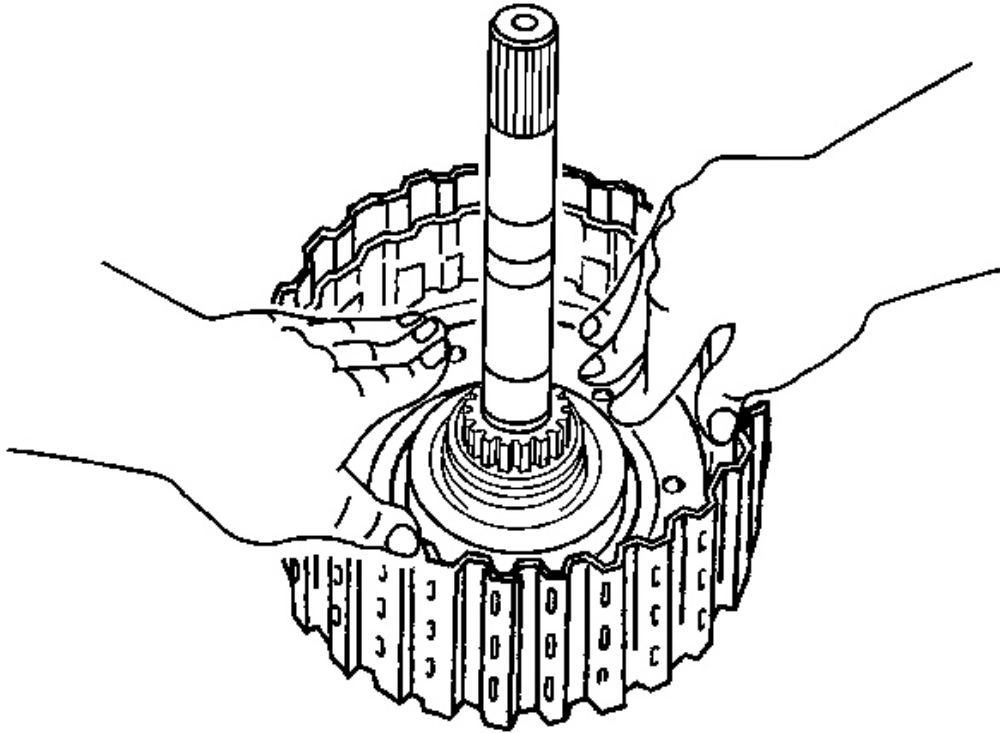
Forward Clutch Drum, O-Ring, Lip Seal & ATF
